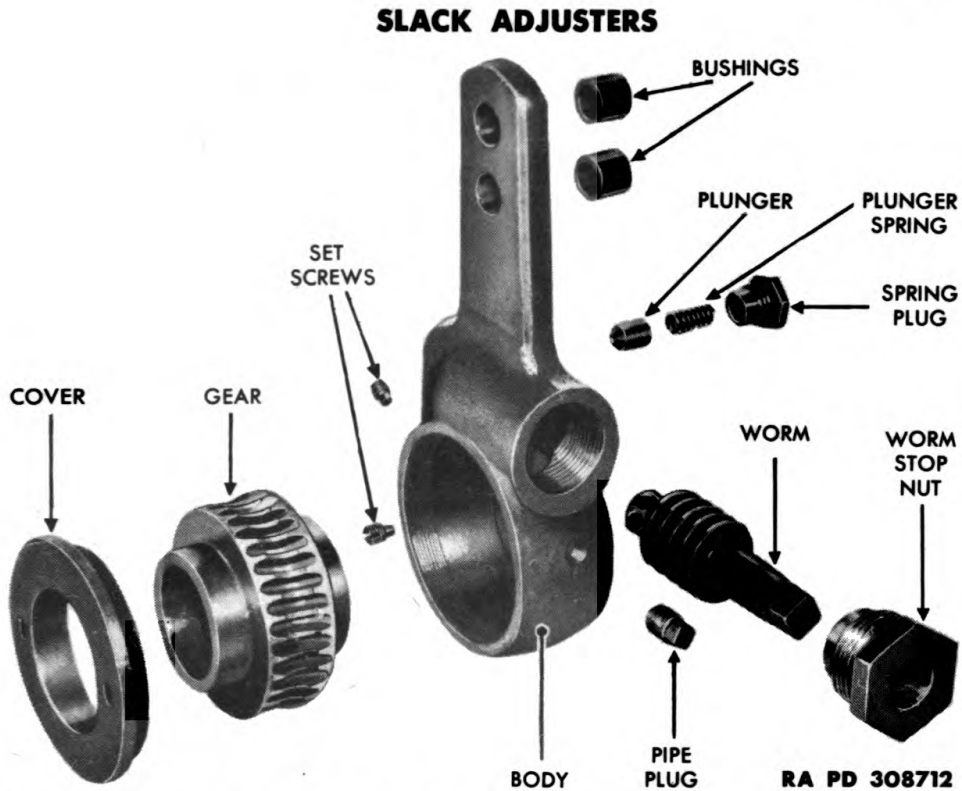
A type-R Slack Adjuster and Repairs Disassembled
